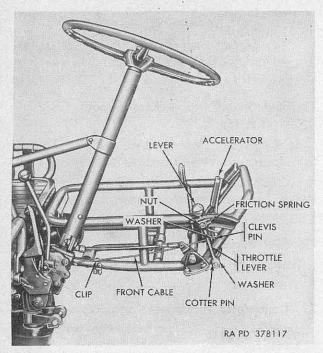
Accelerator, hand throttle, and carburetor control front cable.
